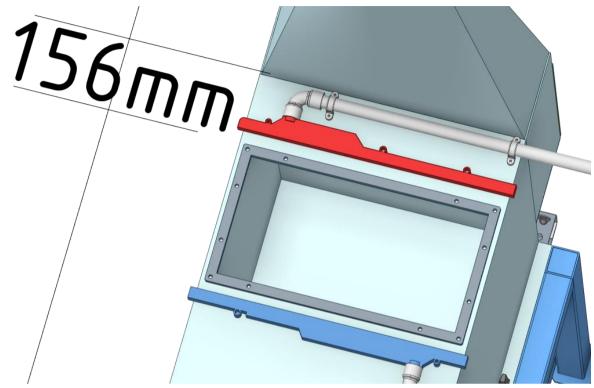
Heating unit air inlet might have to be built further away from the chimney.
